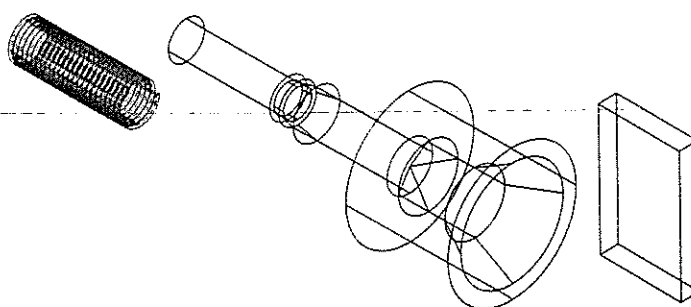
Helical sweep surface, revolve solid, and extrude solid exploded apart
